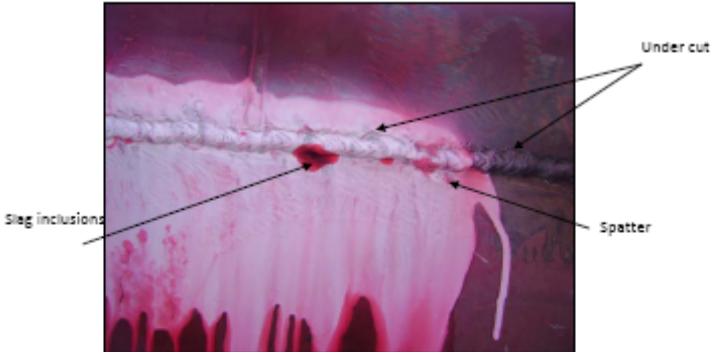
welding defects –butt joint /inter metallic-under cut and spatter.
